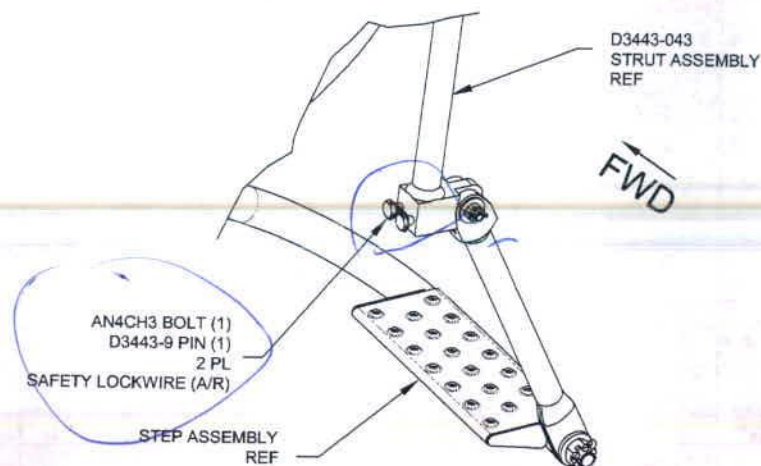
Detail Safety Wiring, D412-630-032 RH, Pilot/Co-Pilot Folding-Step Installation (Shown)
